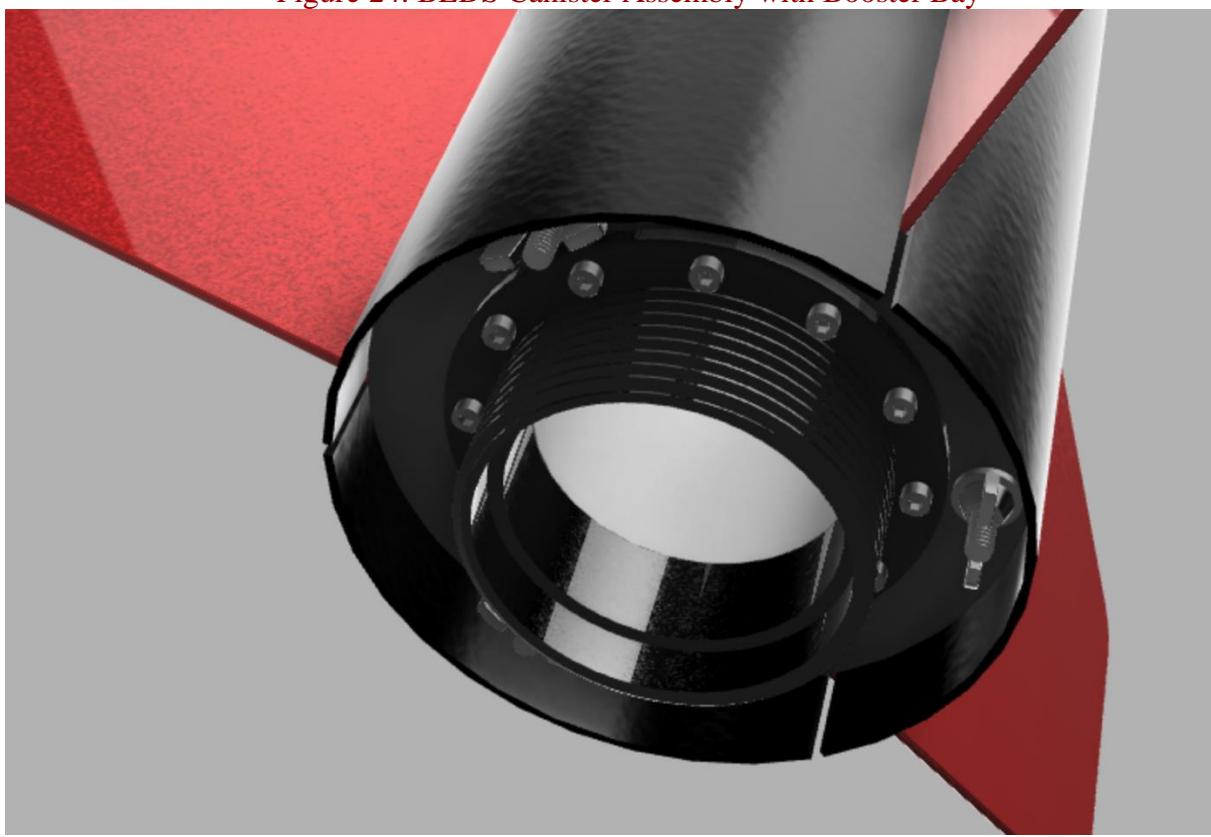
Motor Retainer & Centering Ring Assembly with Booster Bay
